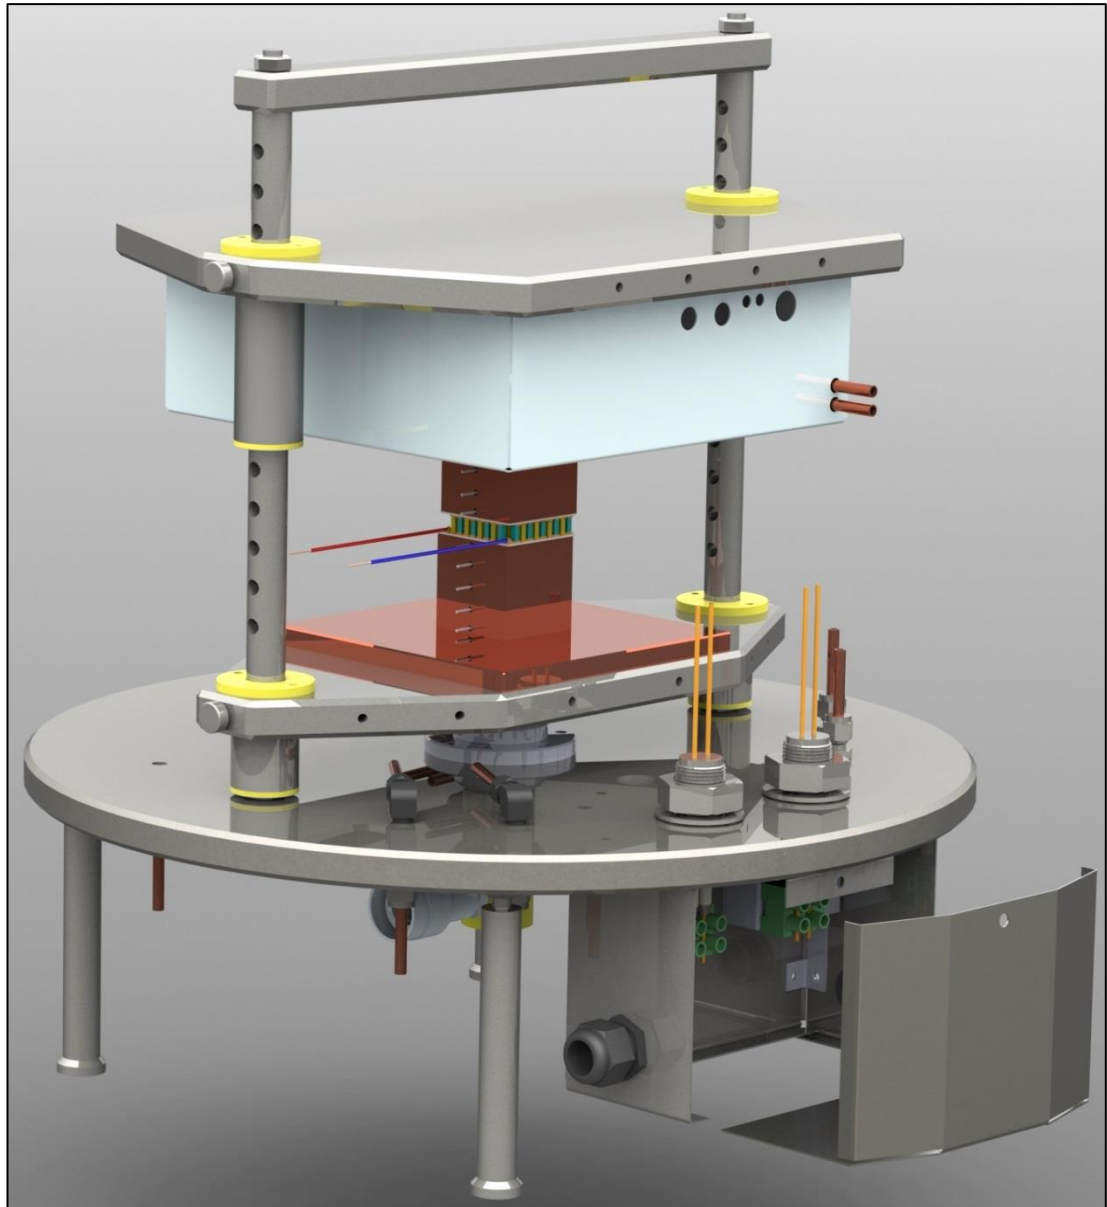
SolidWorks PhotoView 360 2014 render of the measurement system assembly model.
